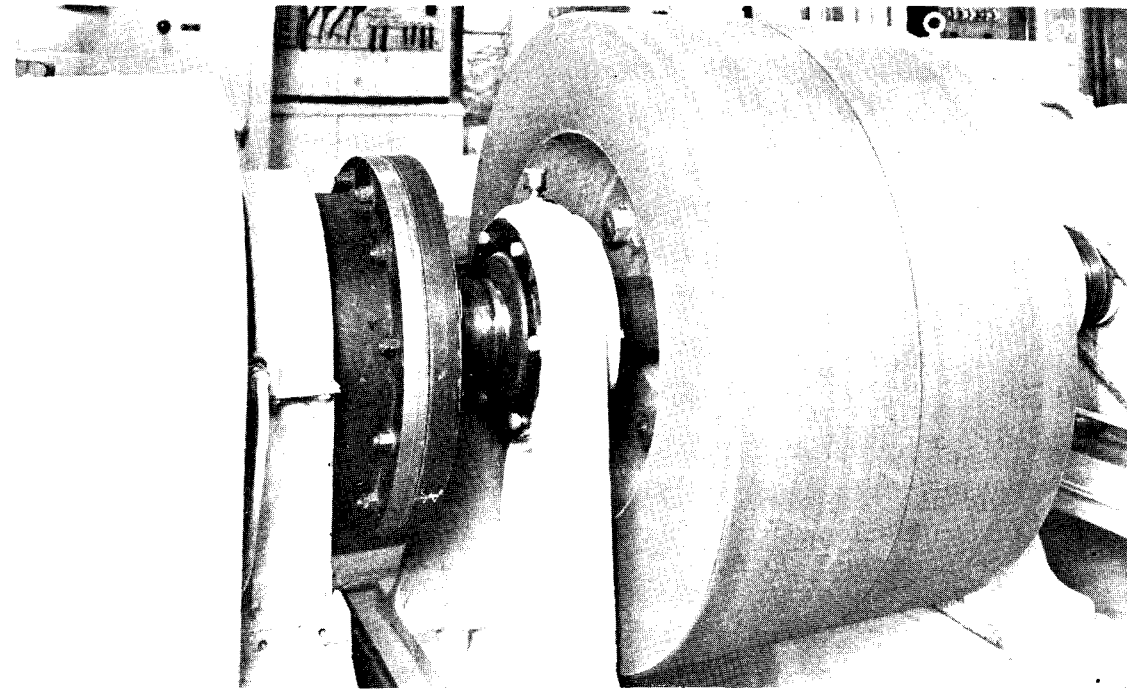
Magnetic clutch and fly-wheel for fly-wheel-start engine set
